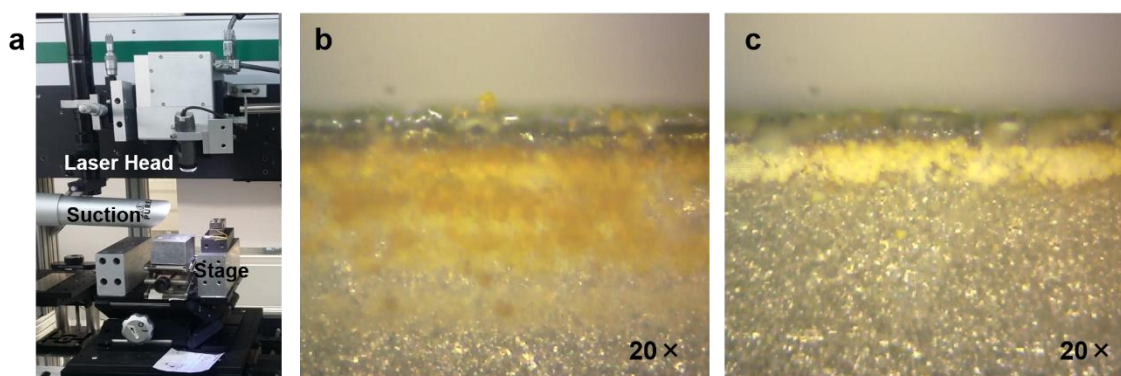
Laser cutting process to pattern the serpentine and spiral beams. (a) laser cutting setup including laser head, stage, and suction tool. Laser cutting edge of the piezoelectric material using (a) CO₂ laser and (b) ultra-short pulse laser.
